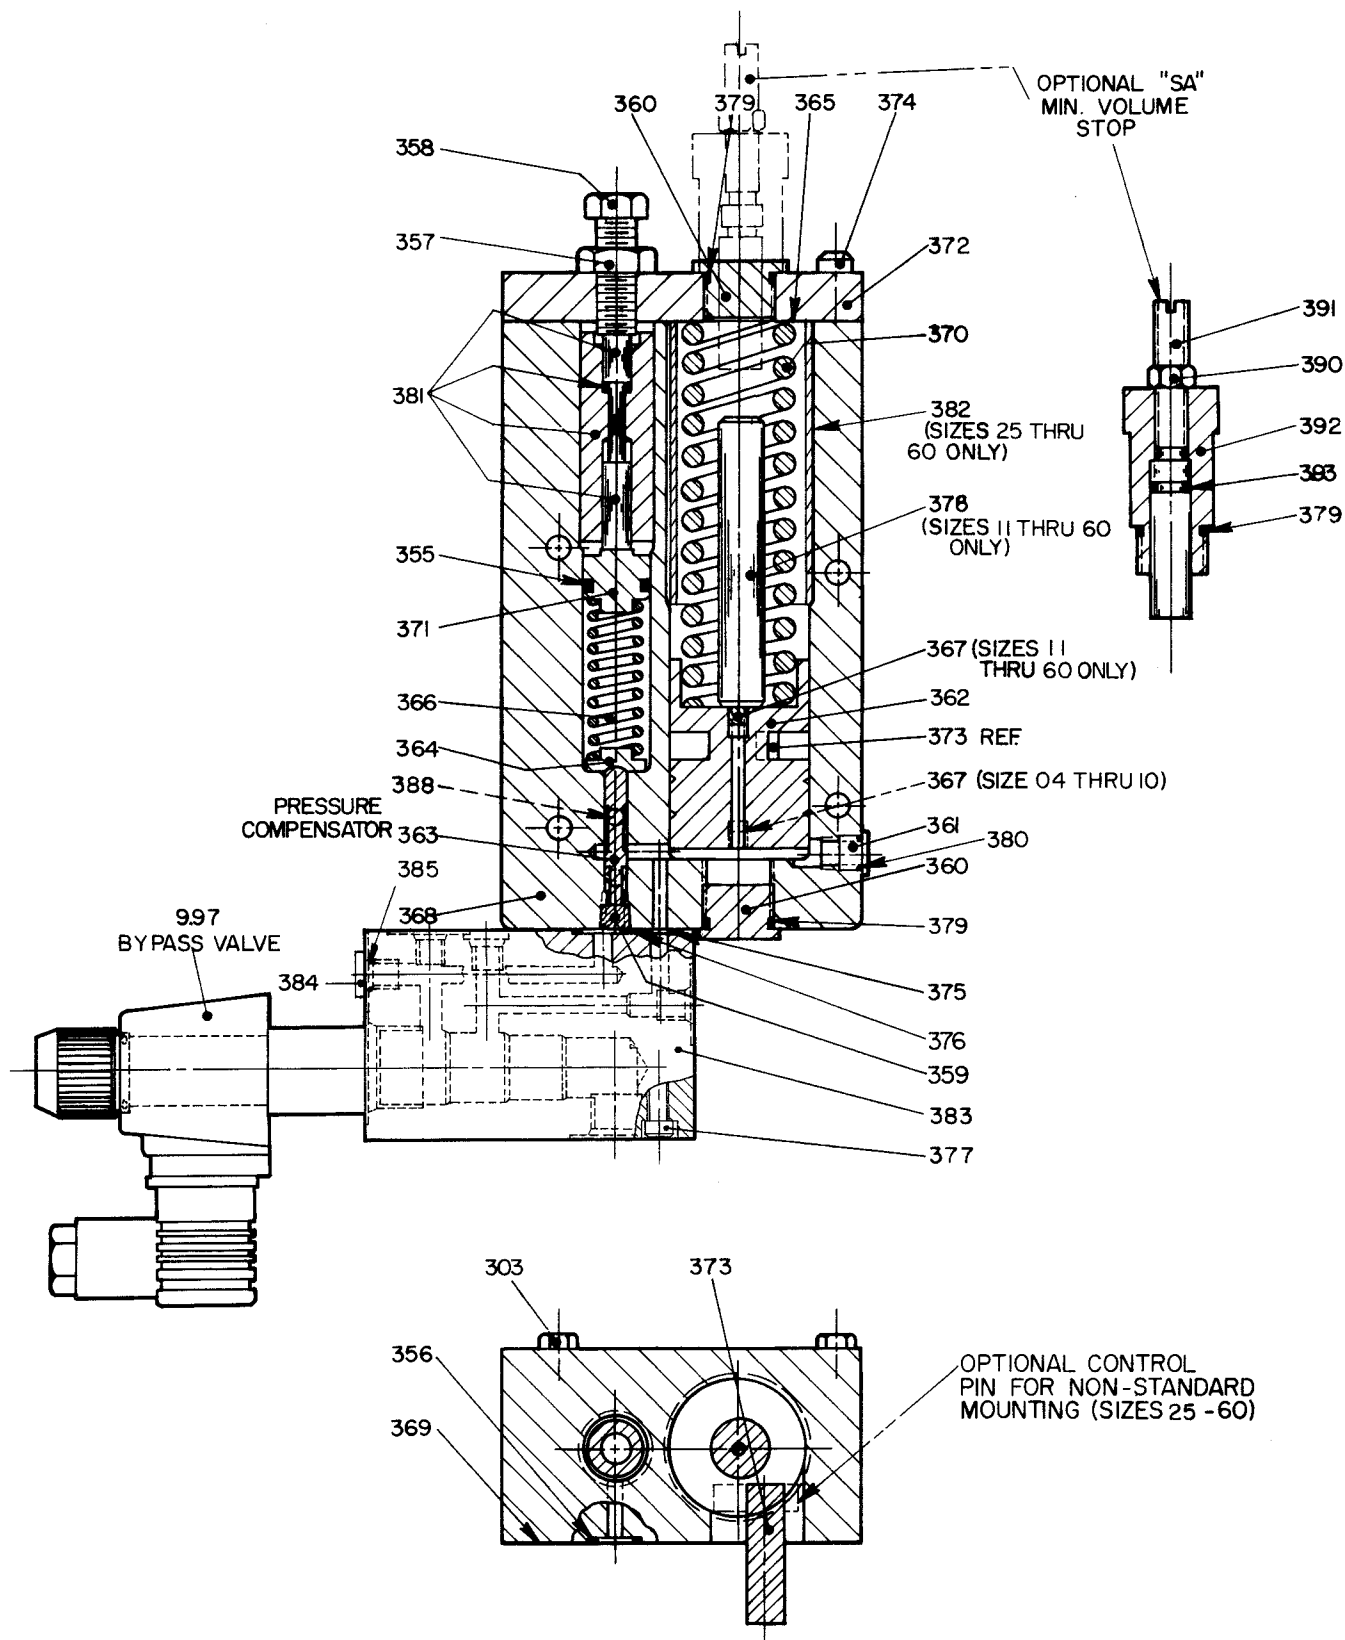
Parts drawing, Hydura type "CU" control (E51316).
